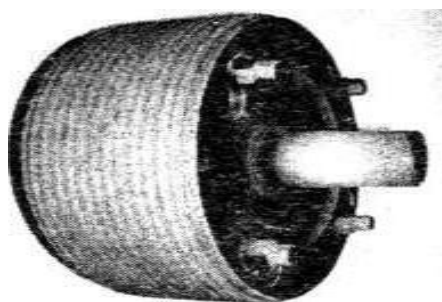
Marine diesel piston ring pack coating and final mechanical 6(8) ЧPH 32/48 after spraying wear-resistant coating processing
